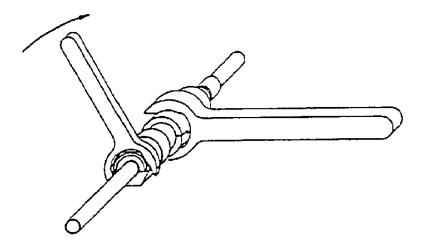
Swaging Process using the Quickfit Mini-Tool
